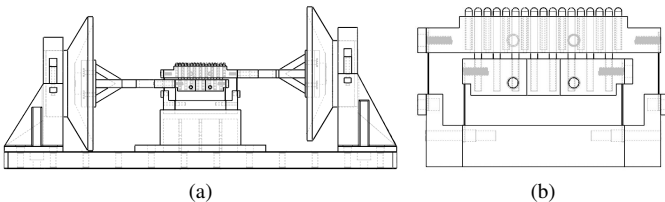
3D Model of the mechanical system. (a) Side view of the entire mechanical system. (b) Close-up of the pin arrays and flexures. Transmission and base parts removed for clarity.
